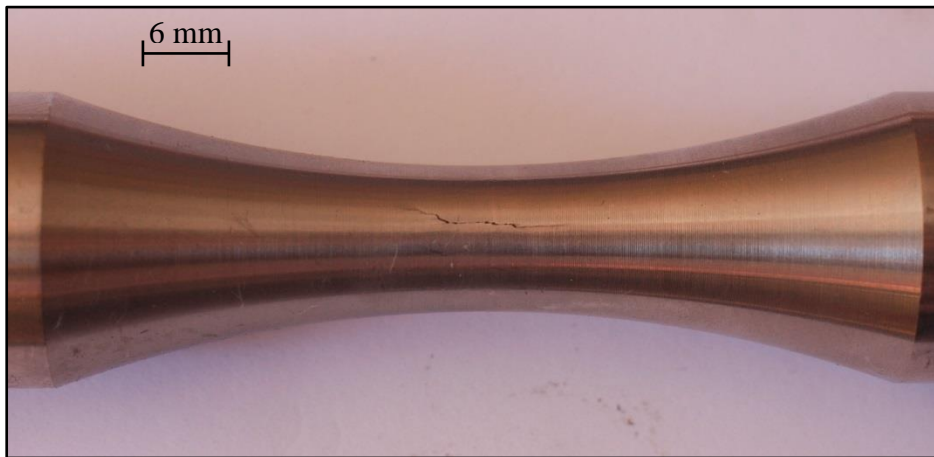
Typical crack propagating from an un-notched specimen under torsion loading.
